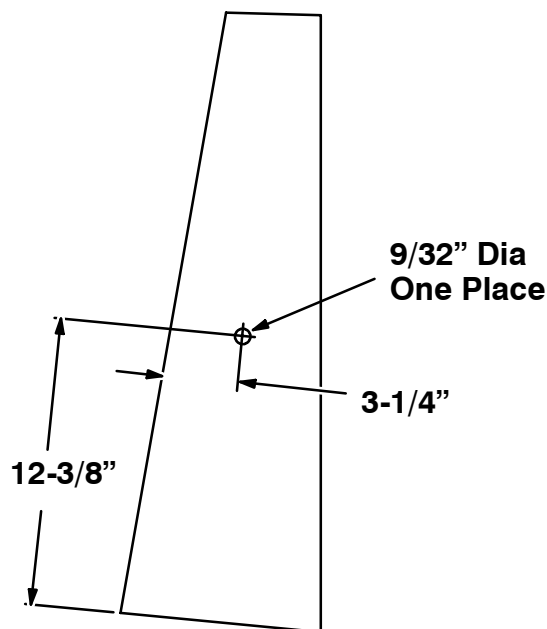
Operator Compartment Back Panel Bumper Hole Location
